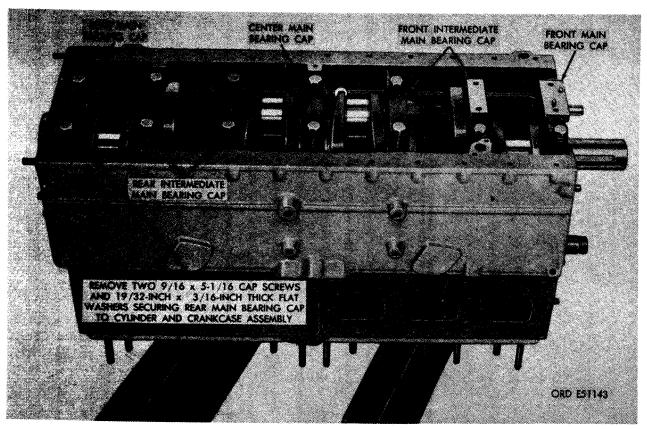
REMOVING OR INSTALLING MAIN BEARING CAP SCREWS.
